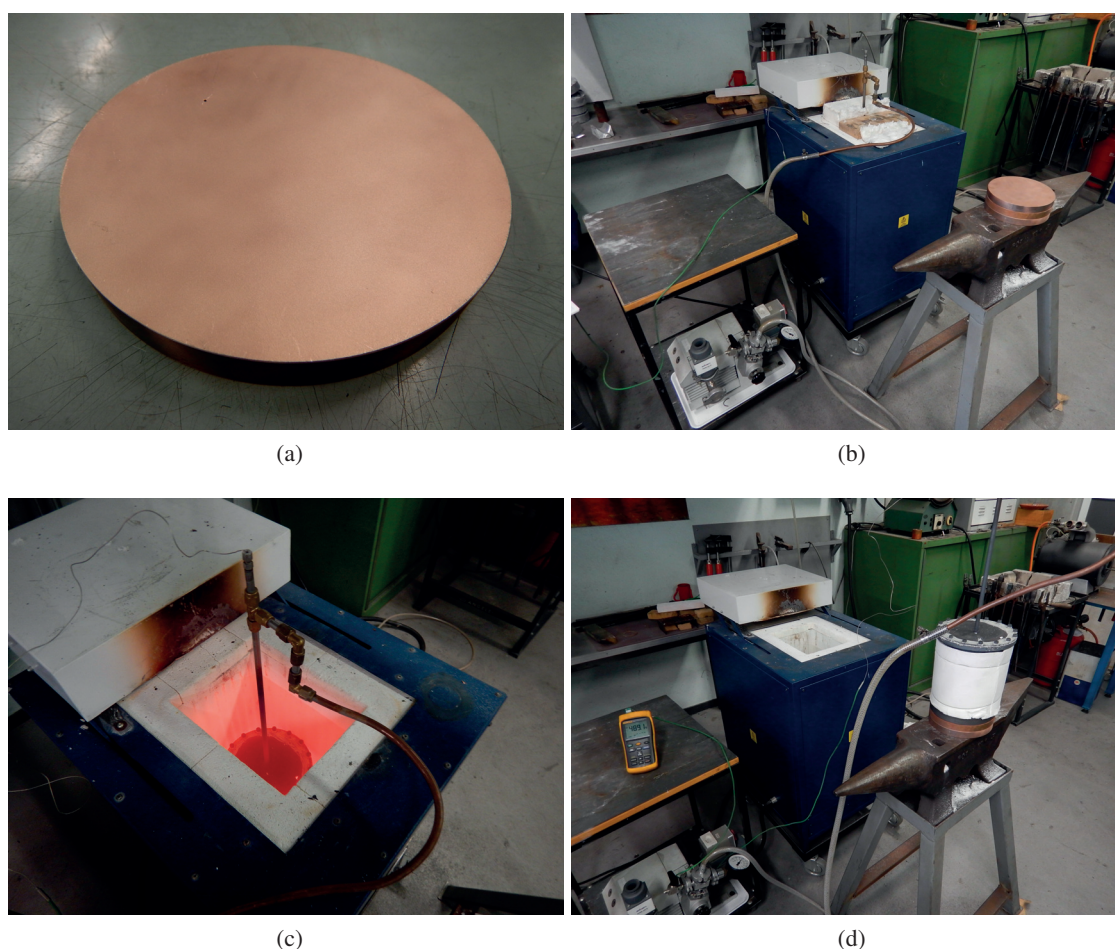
Infiltration and cooling of the chamber. (a) Copper disk used as a heat sink, (b) Full casting set-up with cooling promoted by three copper disks and an anvil, (c) chamber right before cooling and (d) chamber during cooling.
